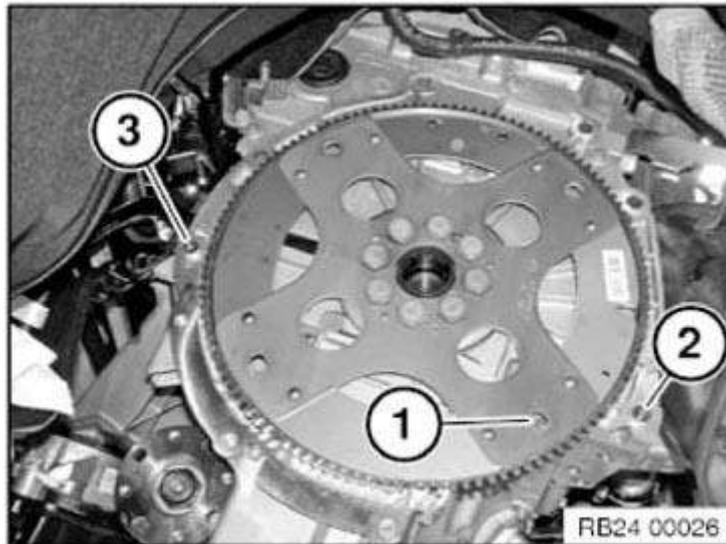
Identifying Driving Plate Bore Hole And Fitting Sleeves
